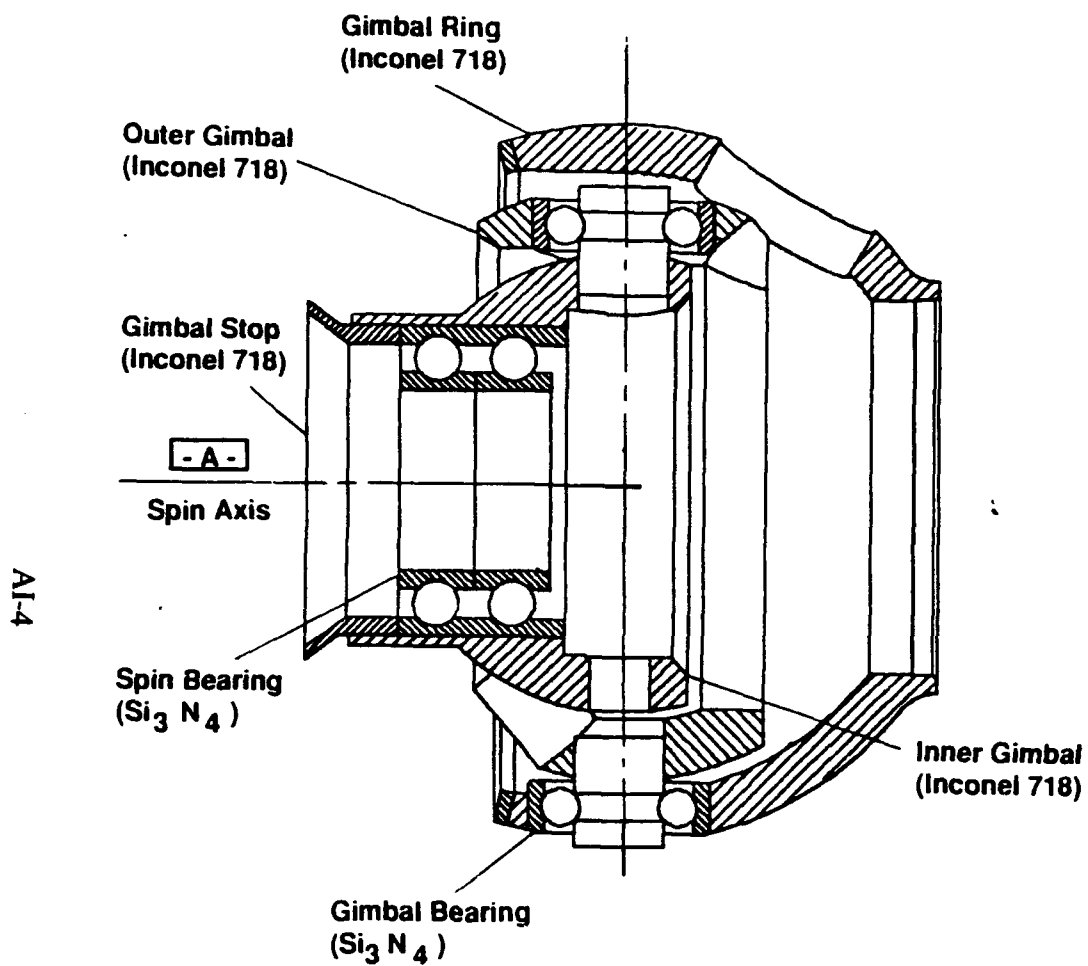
Schematic of the gimbal assembly showing the location of the all-ceramic bearing systems.
